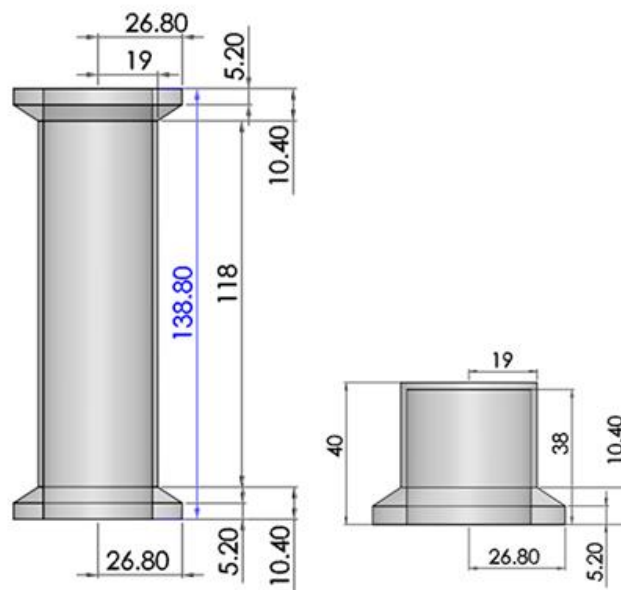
CAD 3D models of the main column and inlet/outlet cup of the optimised sFBB prototype. Transparent model for inside view with specified dimensions. Dimensions are expressed in mm.
